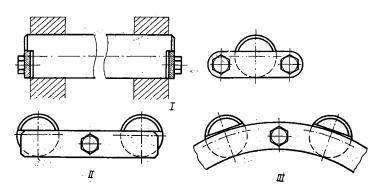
Pivot pin fixed against axial and angular displacements by end plates
